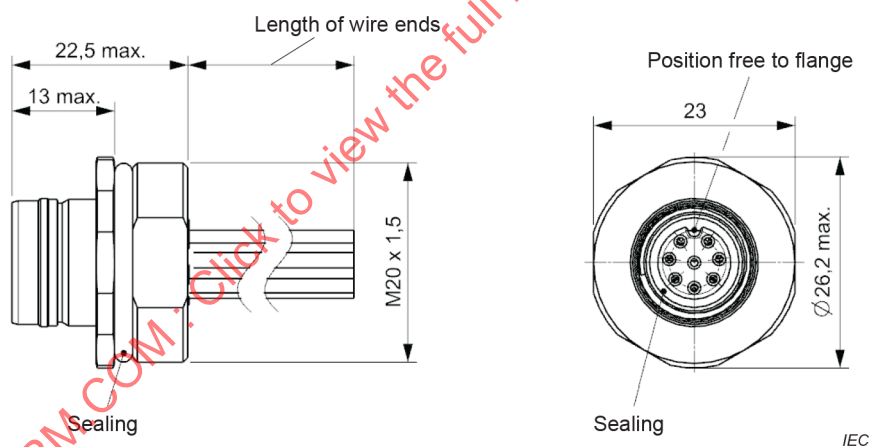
Fixed connector, female contacts, with M12 screw locking and outer push-pull locking, with wire ends, single hole front mounting thread M20 × 1,5
